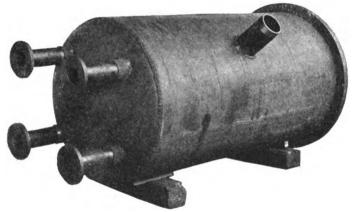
Tank with Head, Flange and Connections Welded in Place Courtesy of C. & C. Electric and Manufacturing Company
